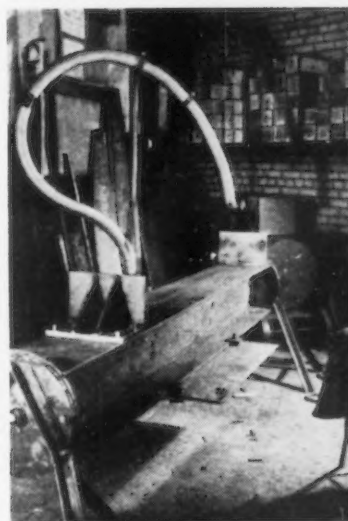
Simple welding fixture composed of a 12-in. H-beam pivoted at the ends to place work in longitudinal position.
